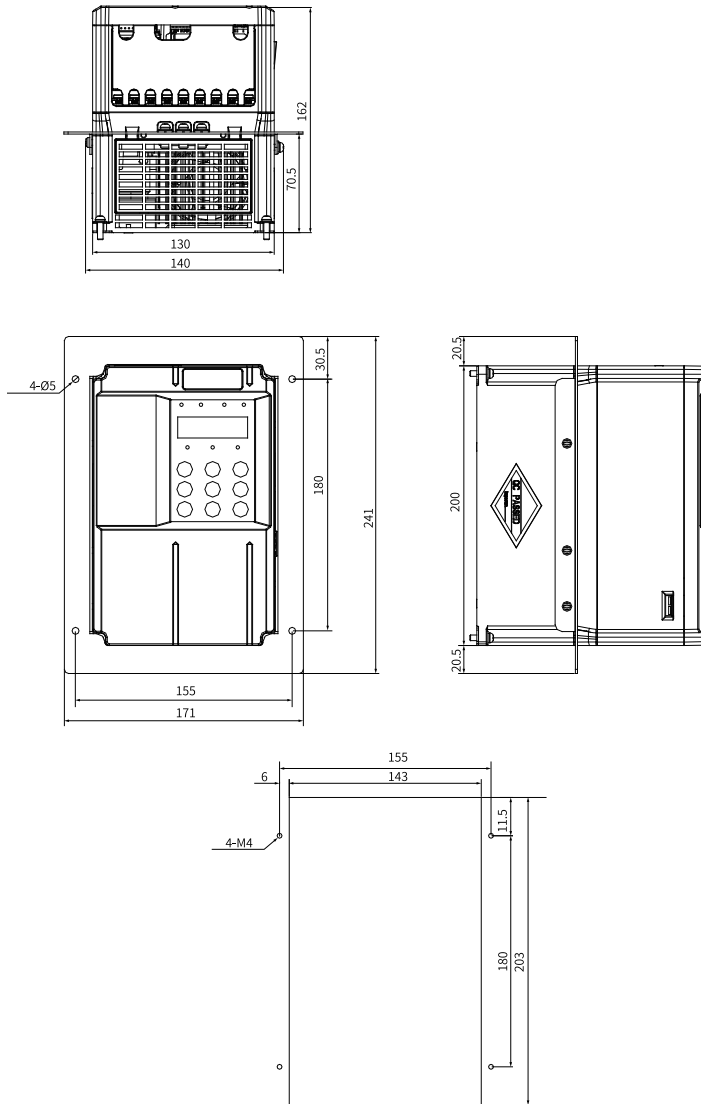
Dimensions of the MD500-AZJ-A1T2 bracket and mounting hole
